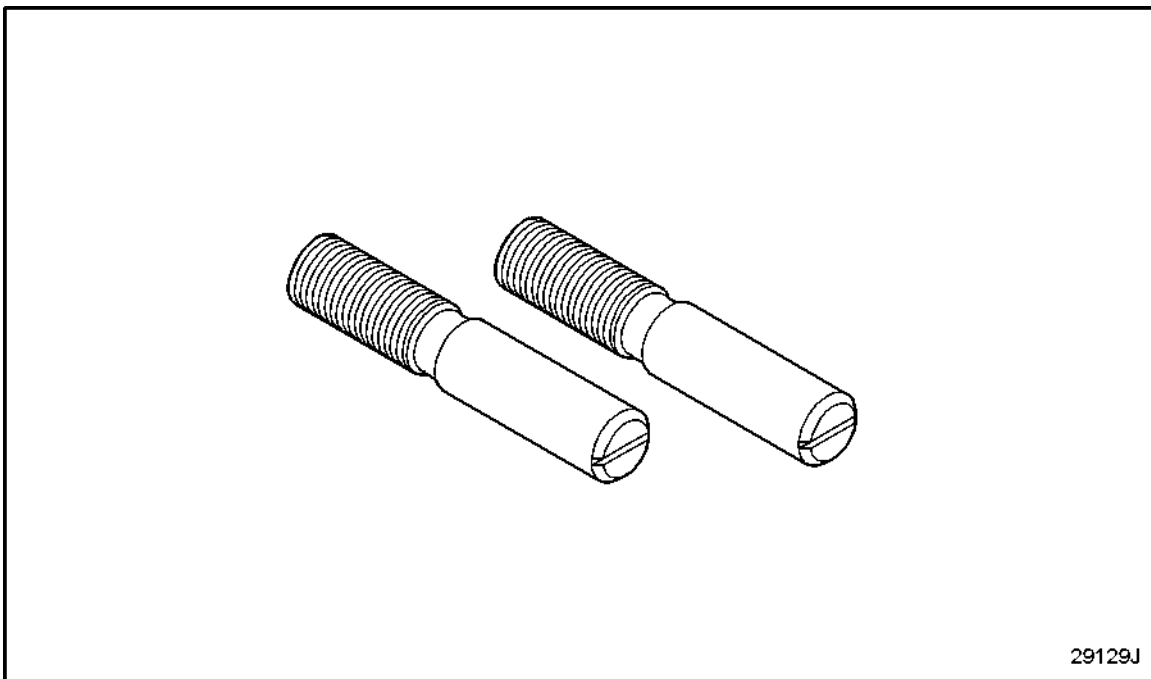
Rear Seal Expander Guide Studs,J 25002
